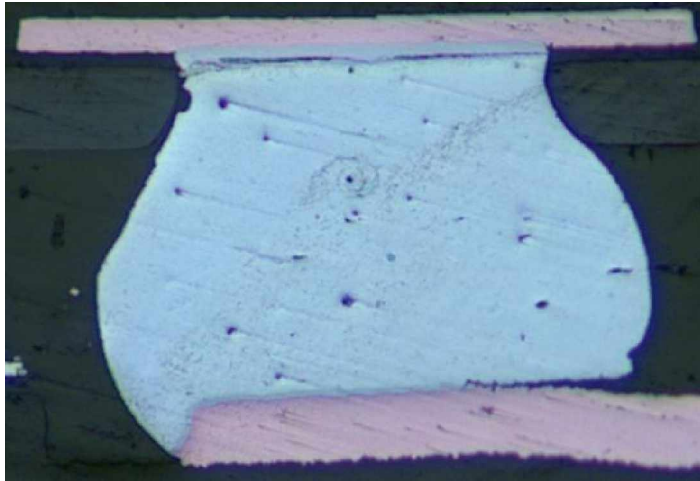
95.5Sn4.0Ag0.5Cu Solder Interconnect failure at the package-to-solder interface and at the solder-to-board interface.
